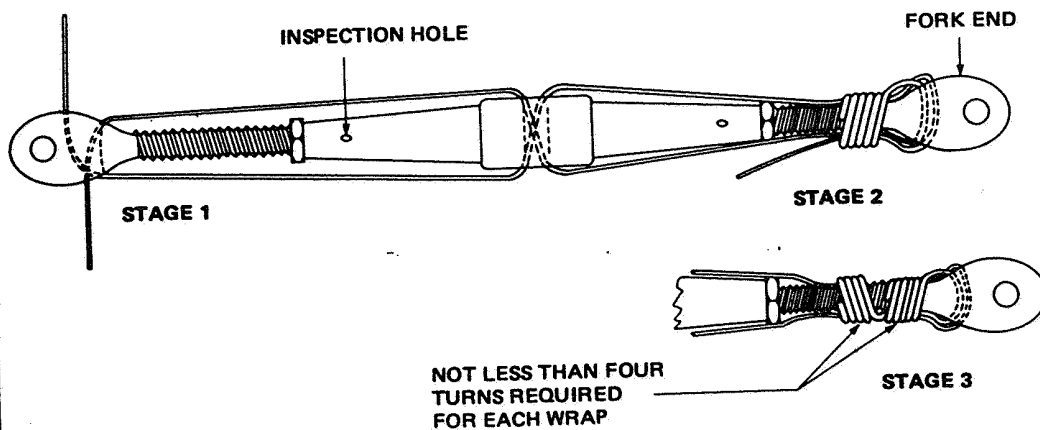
ALTERNATIVE METHOD OF WIRE-LOCKING TURNBUCKLE WITH FORK END-FITTINGS
